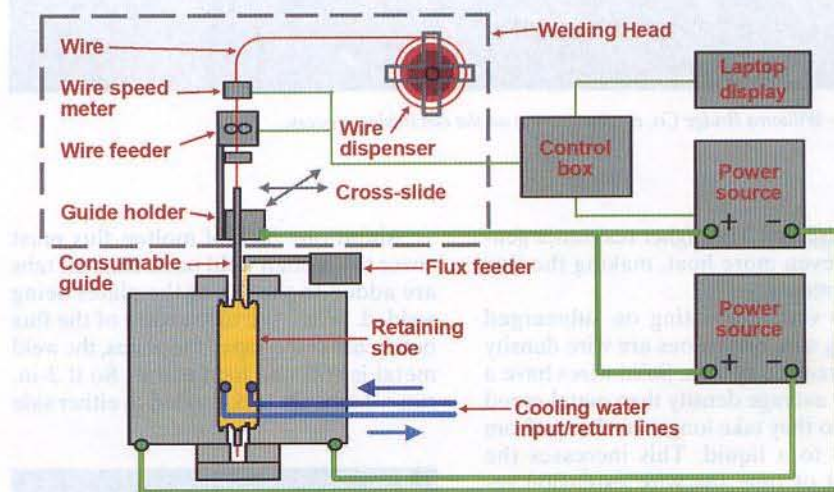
Schematic of the computer-controlled electroslag welding system.
